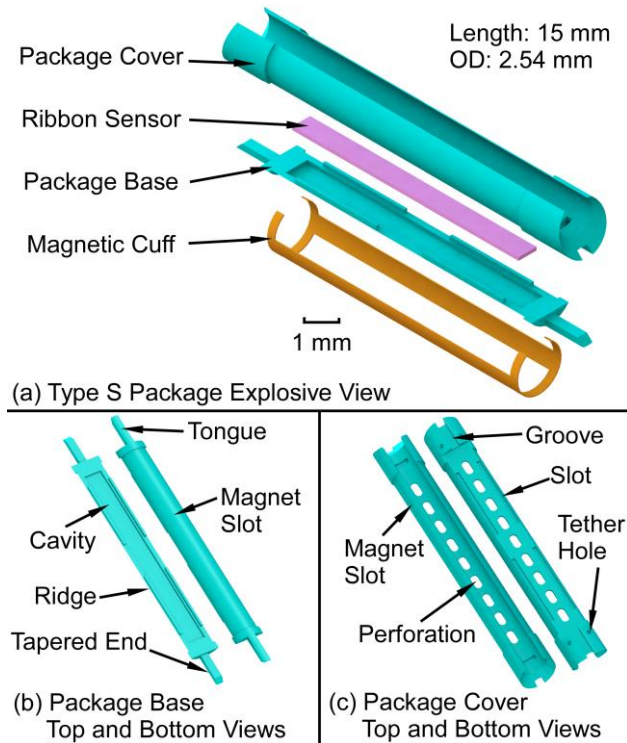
(a) The exploded view of the Type S package. (b) The top and bottom views of the package base. (c) The top and bottom views of the package cover.
